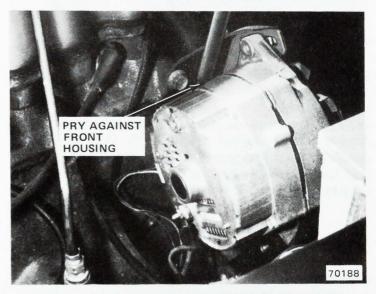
C-15 Alternator Adjustment—Six-Cylinder without Air Conditioning (Except Pacer)
